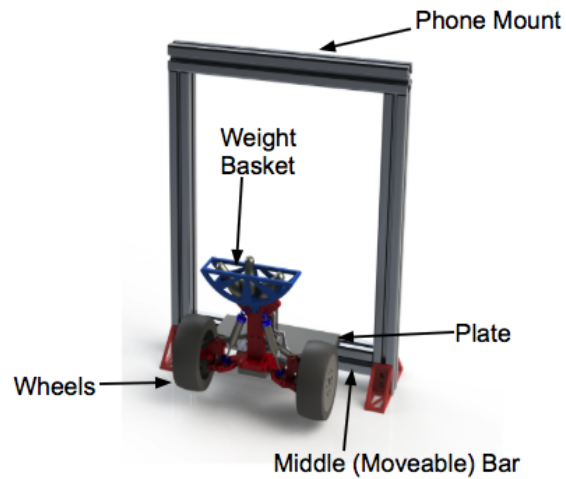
Steering Test Rig for Fatigue Test (as Reproduced from Boggess et al.)
